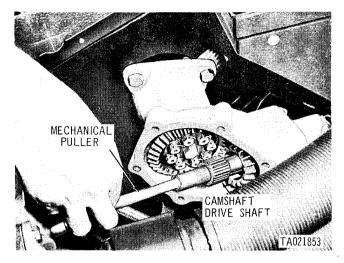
Removing or installing camshaft drive shaft using mechanical puller.
